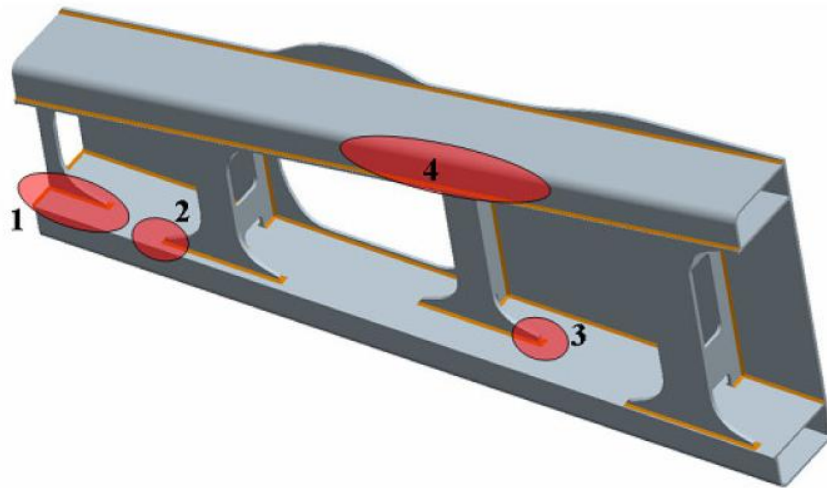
4 critical welded regions of a lower chassis [43]
